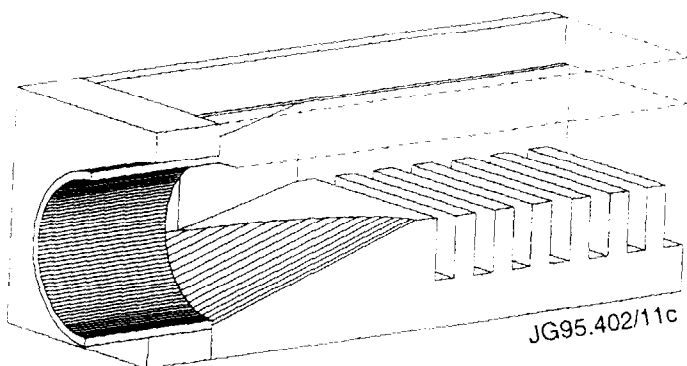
Hypervapotron beam stopping elements as used in the JET Test Bed beam bump, the calorimeter, and the Test Bed box scraper (TBBS). The length is 1000 and 500 mm. Feed diameter is 40 and 20 mm id. The scraper element has a hair pin flow with an internally closed loop.
